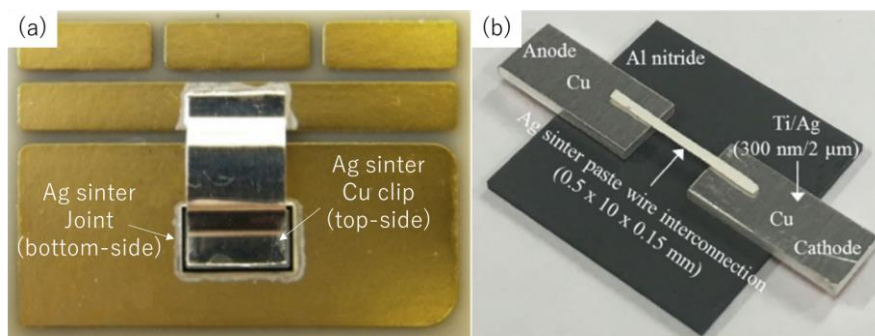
Applications of the Ag sinter paste: (a) joint and clip bonding and (b) printed Ag sinter wire [17, 18].
